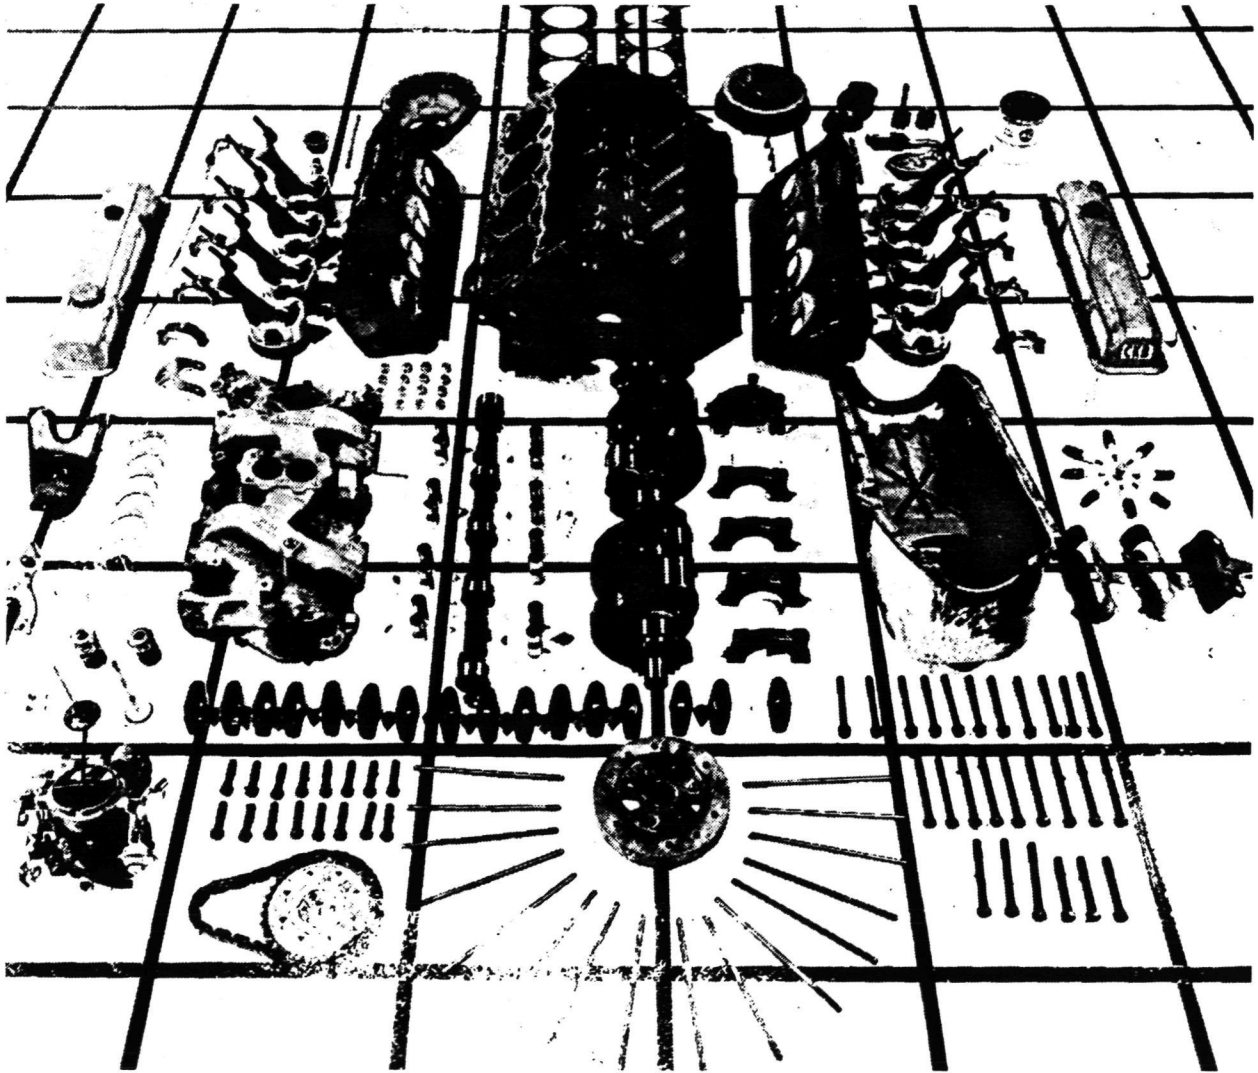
Disassembled 1972 V-8 automobile engine
